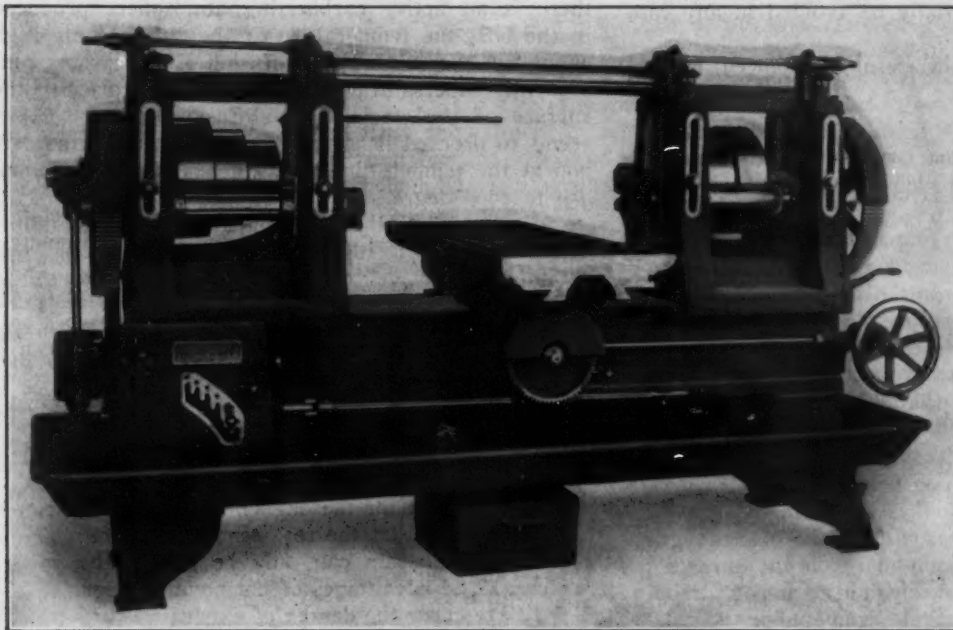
The New Heavy Double-Head Lincoln Milling Machine, Built by the Hendey Machine Company, Torrington, Conn.
